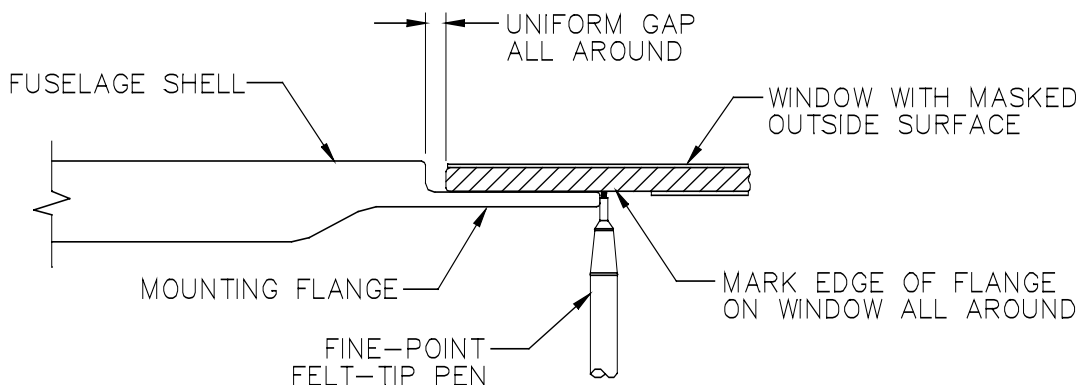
Marking the Edge of the Mounting Flange on the Inside of the Window
